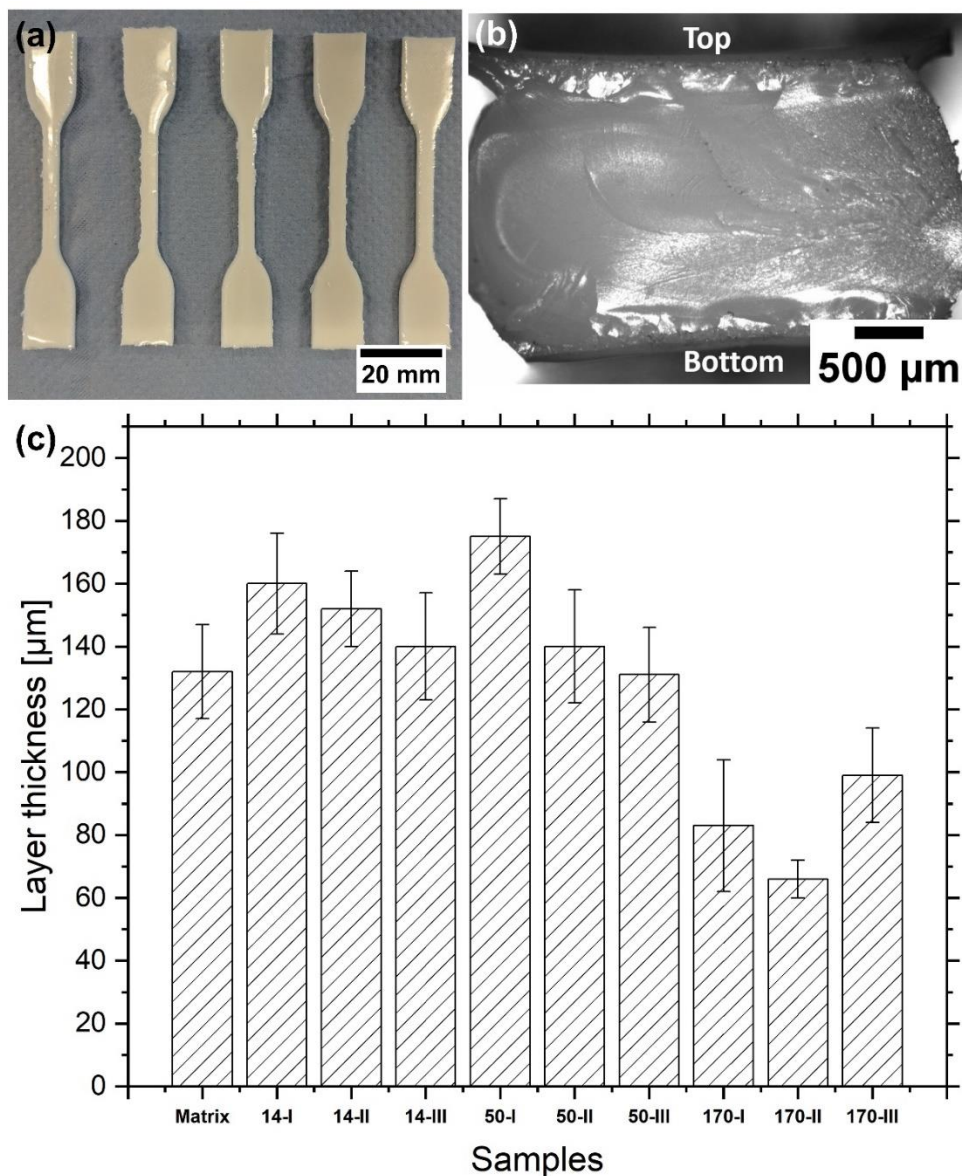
(a) Printed tensile specimens of 170-III, (b) Cross-section of one of the specimens. (c) Layer thickness of five subsequently printed layers with a UV curing step after their deposition for all printed inks.
